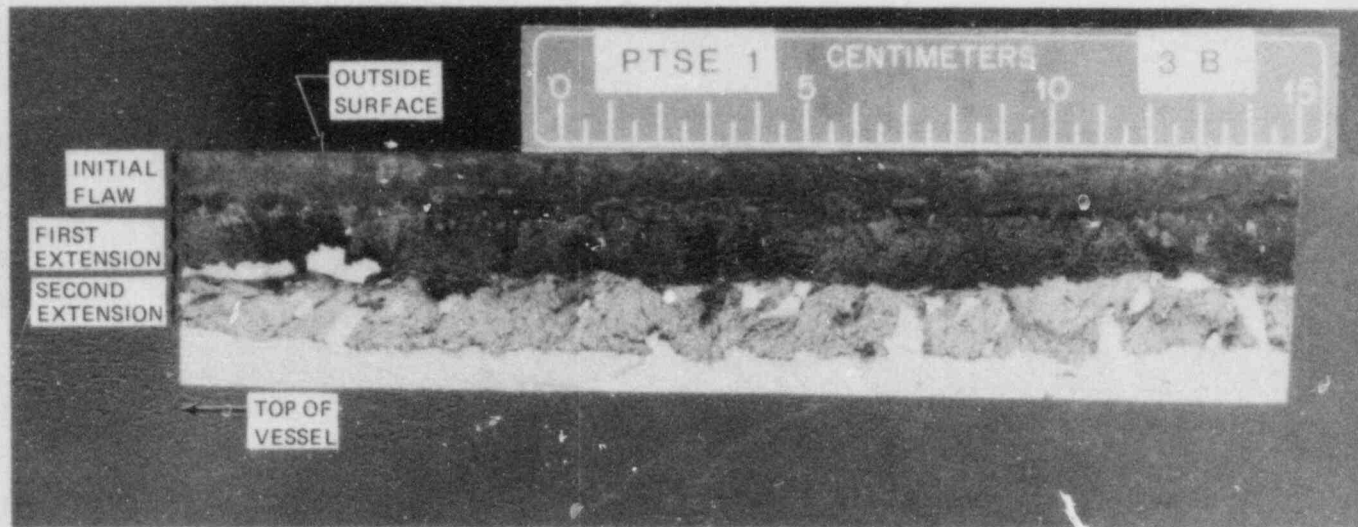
Fracture surface B of segment 3 of PTSE-1 flaw is piece, next to midplane of flaw, shows deepest part of flaw. (See fig. 10.3 for key to location.)
